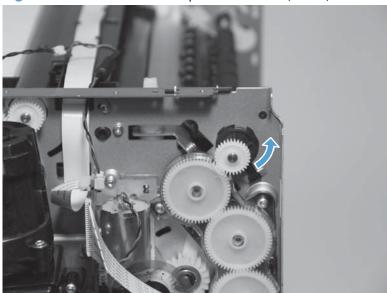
Remove the output drive shaft 5 (2 of 2)
